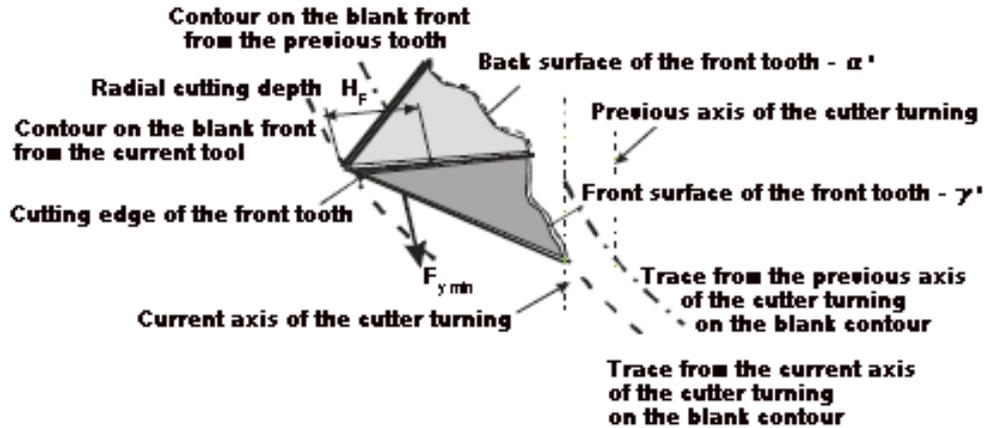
Conical part of a shank cutter at a contour millicut-in
